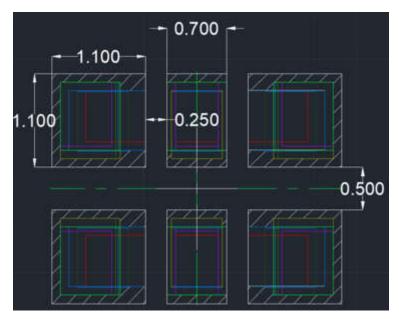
6-Pin, 3.2mm × 2.5mm DLE Universal Land Pattern Overlaid With 11 Device Footprints
